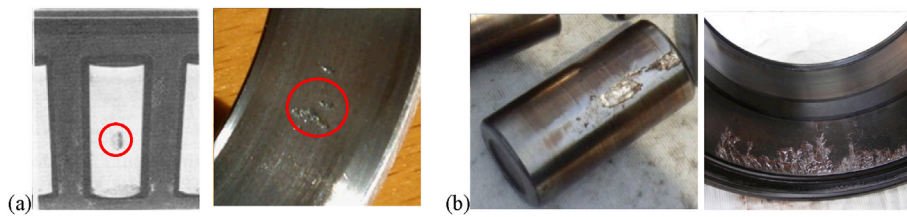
The natural defect of roller bearing: (a) Early fatigue spalling [5,12]; (b) Severe fatigue spalling.
